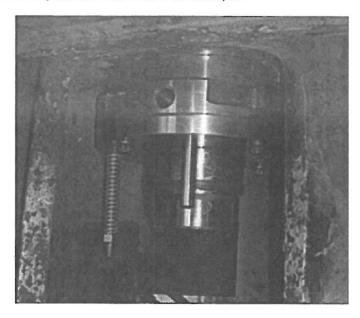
Modified Procedure: Installed Upper Sleeve
